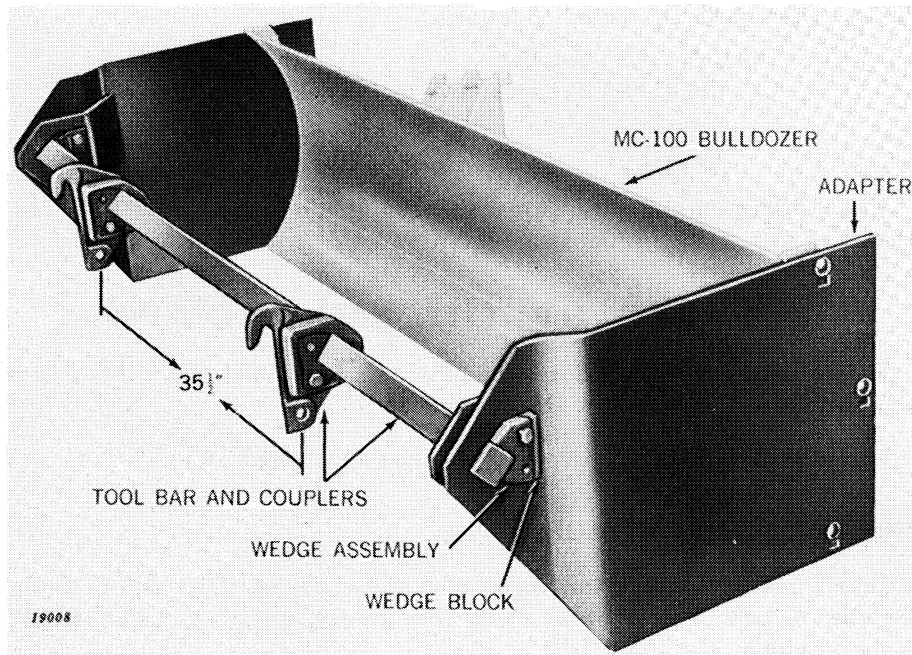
Rear Dozer Adapter and Tool Bar Installed
